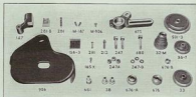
Parts of Metric Transposing Quick Change Gear Equip't.
